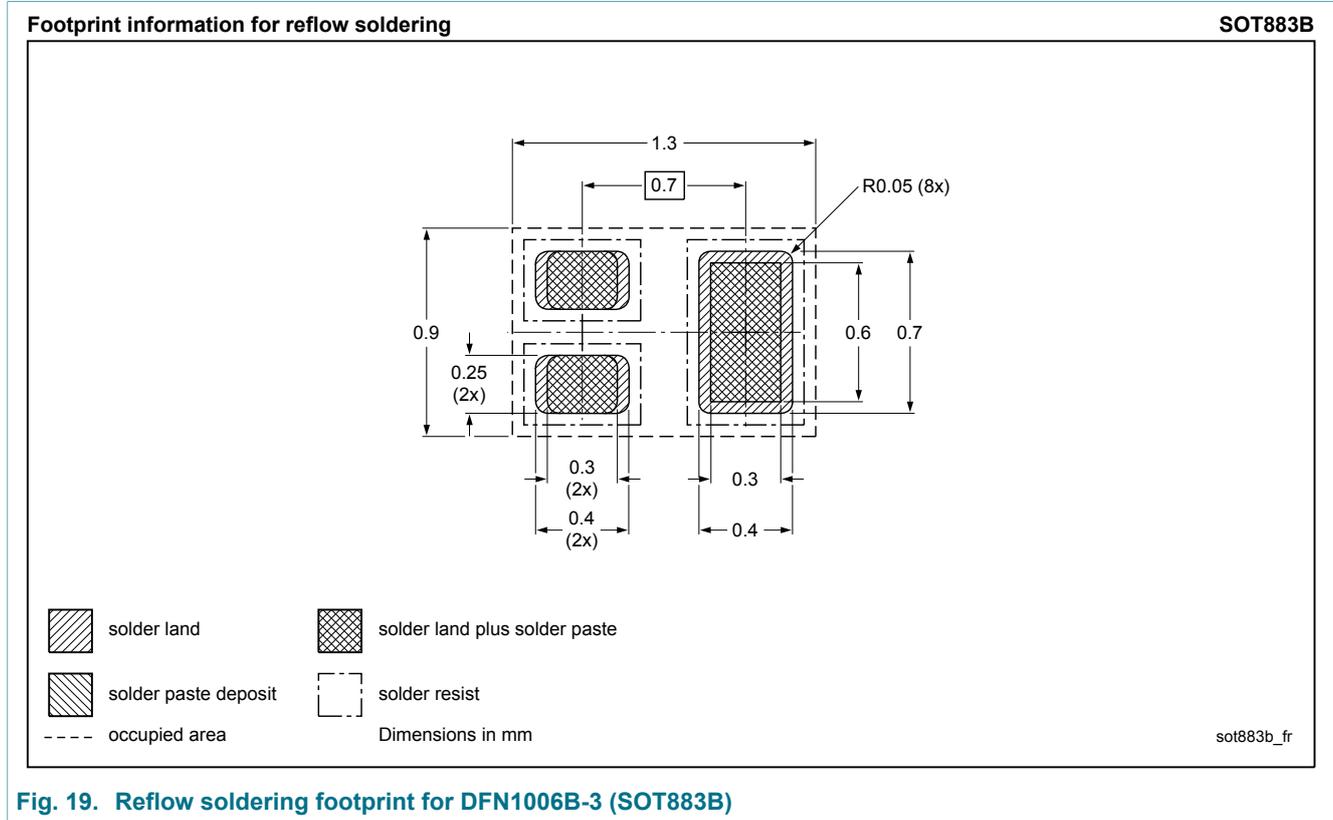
Reflow soldering footprint for DFN1006B-3 (SOT883B)
